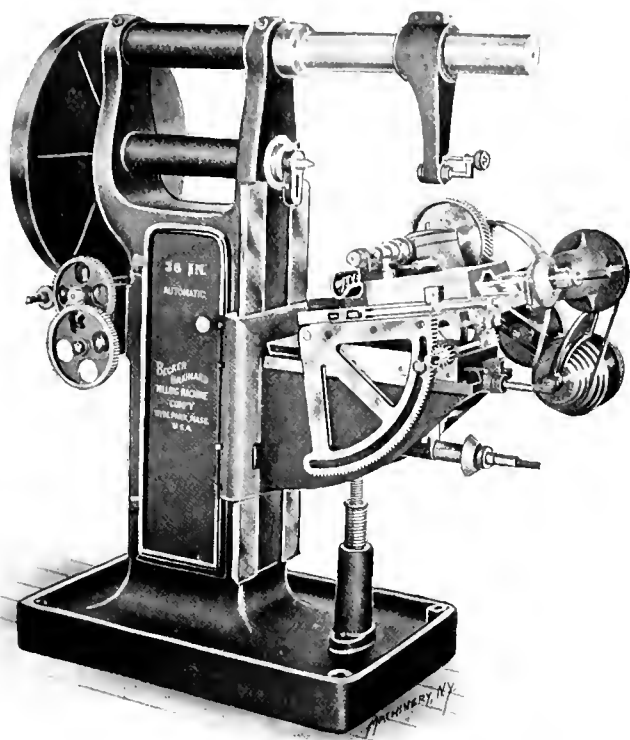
The Becker-Brainard Automatic Gear Cutting Machine.
